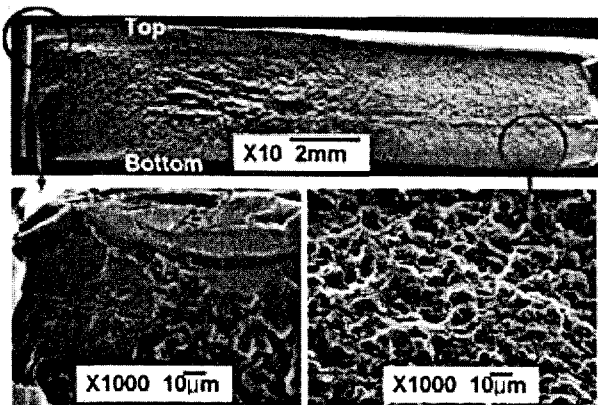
SEM fractograph of Friction stir welded Al6061-T6 without back-bead specimen, fatigued along weld zone for which the crack initiated at root groove.
